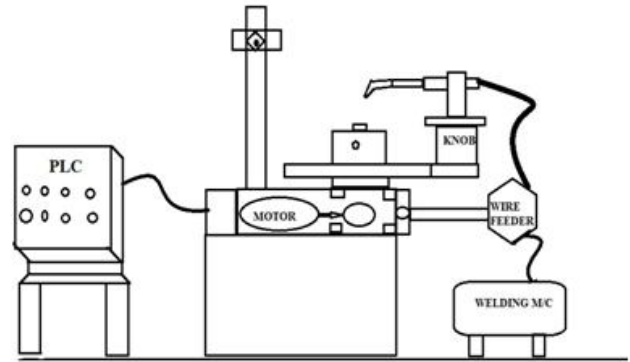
Visual design of Rotary torch SPM welding machine
